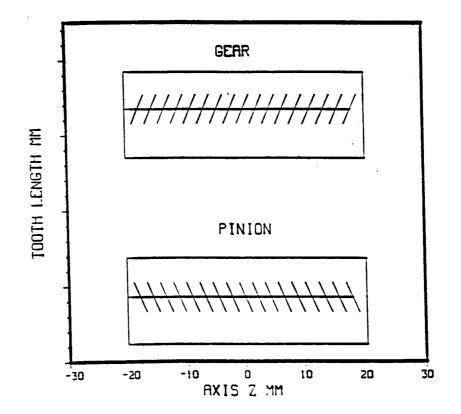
Contact pattern for modified involute helical gears with aligned axes
